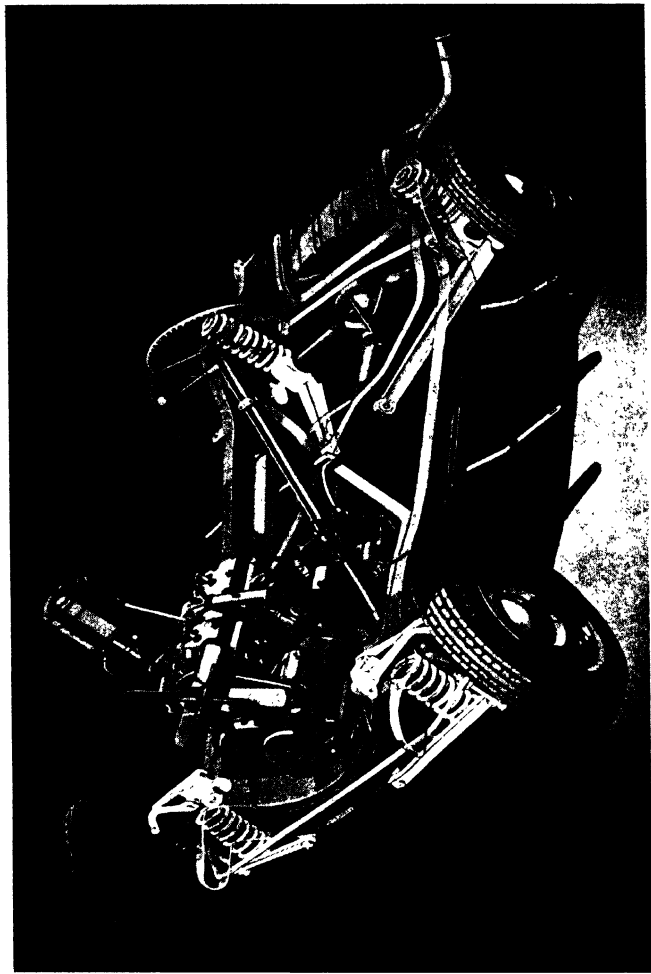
THE OLDSMOBILE "SERIES 60" CHASSIS, SHOWING THE USE OF COIL SPRINGS AT FRONT AND REAR
